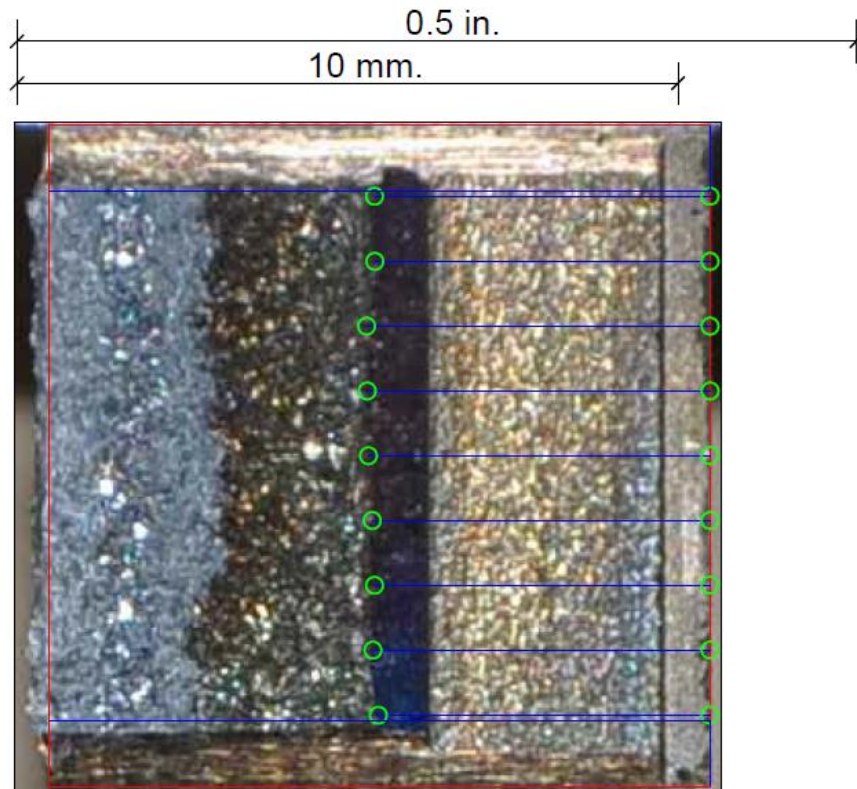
Specimen 4-5' Fracture Surface
